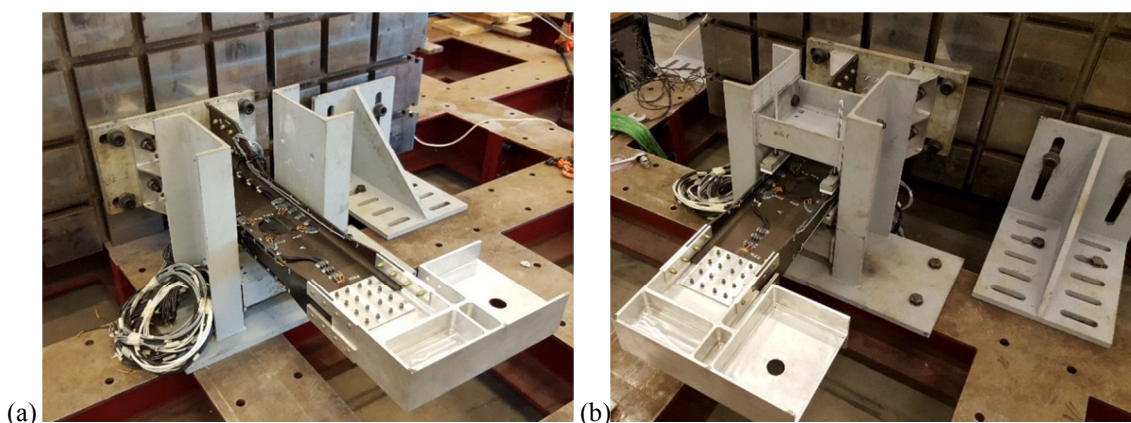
Spar positioning on cubic benches structure (a) and anti-buckling structural setup (b).
